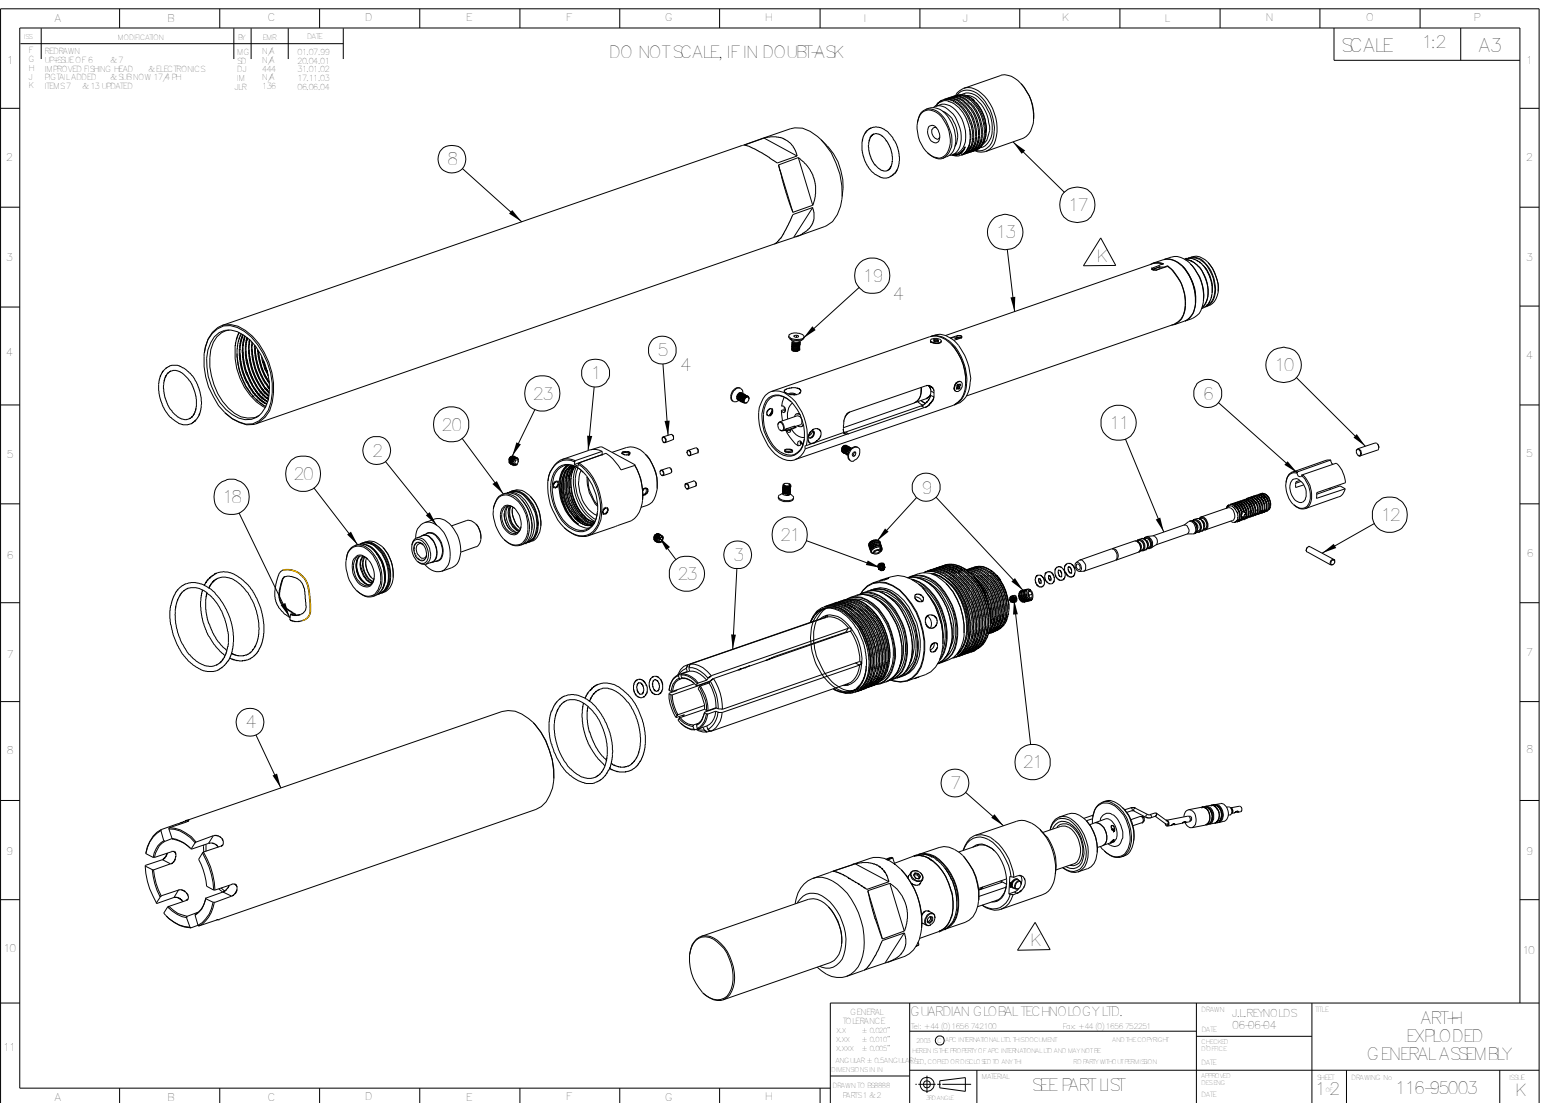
Exploded Assembly Drawing, ART-H - 116-95003-K
